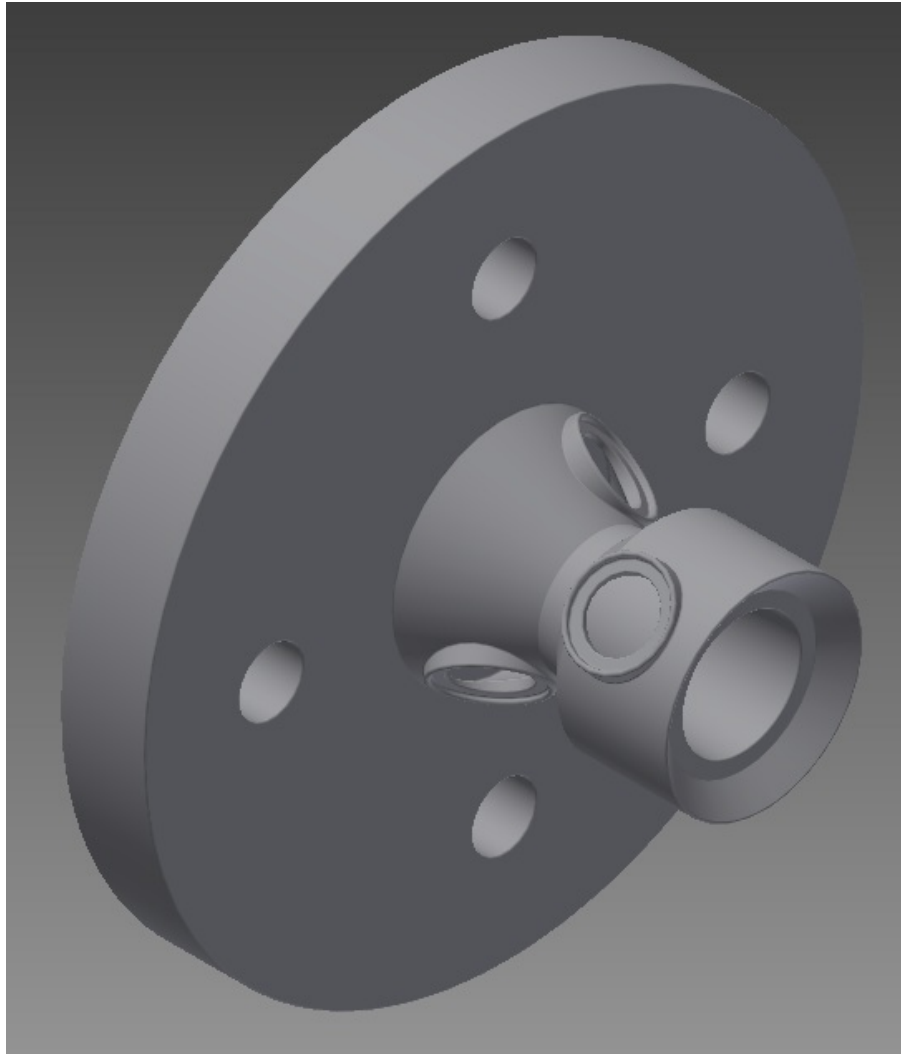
Final Cooling System Manifold Design with 2 Inlets, 2 Outlets, and Internal Baffling
